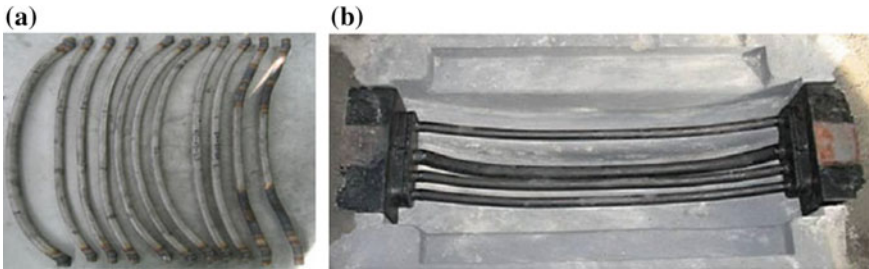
a Tubes are cut and bent, b and replaced into the sand mold before casting [27]
